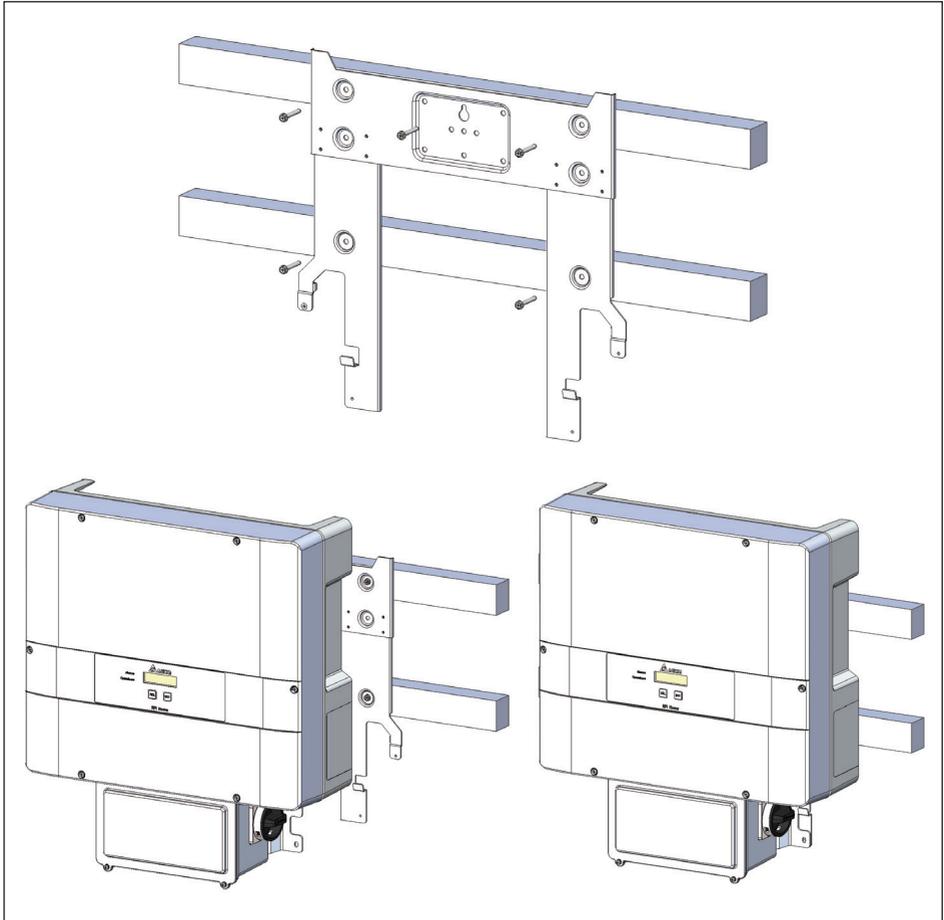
Attaching the mounting bracket for RPI H7U
